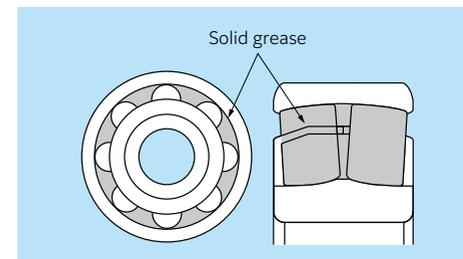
Spherical roller bearing with full-pack solid grease (Available for spherical roller bearings)
